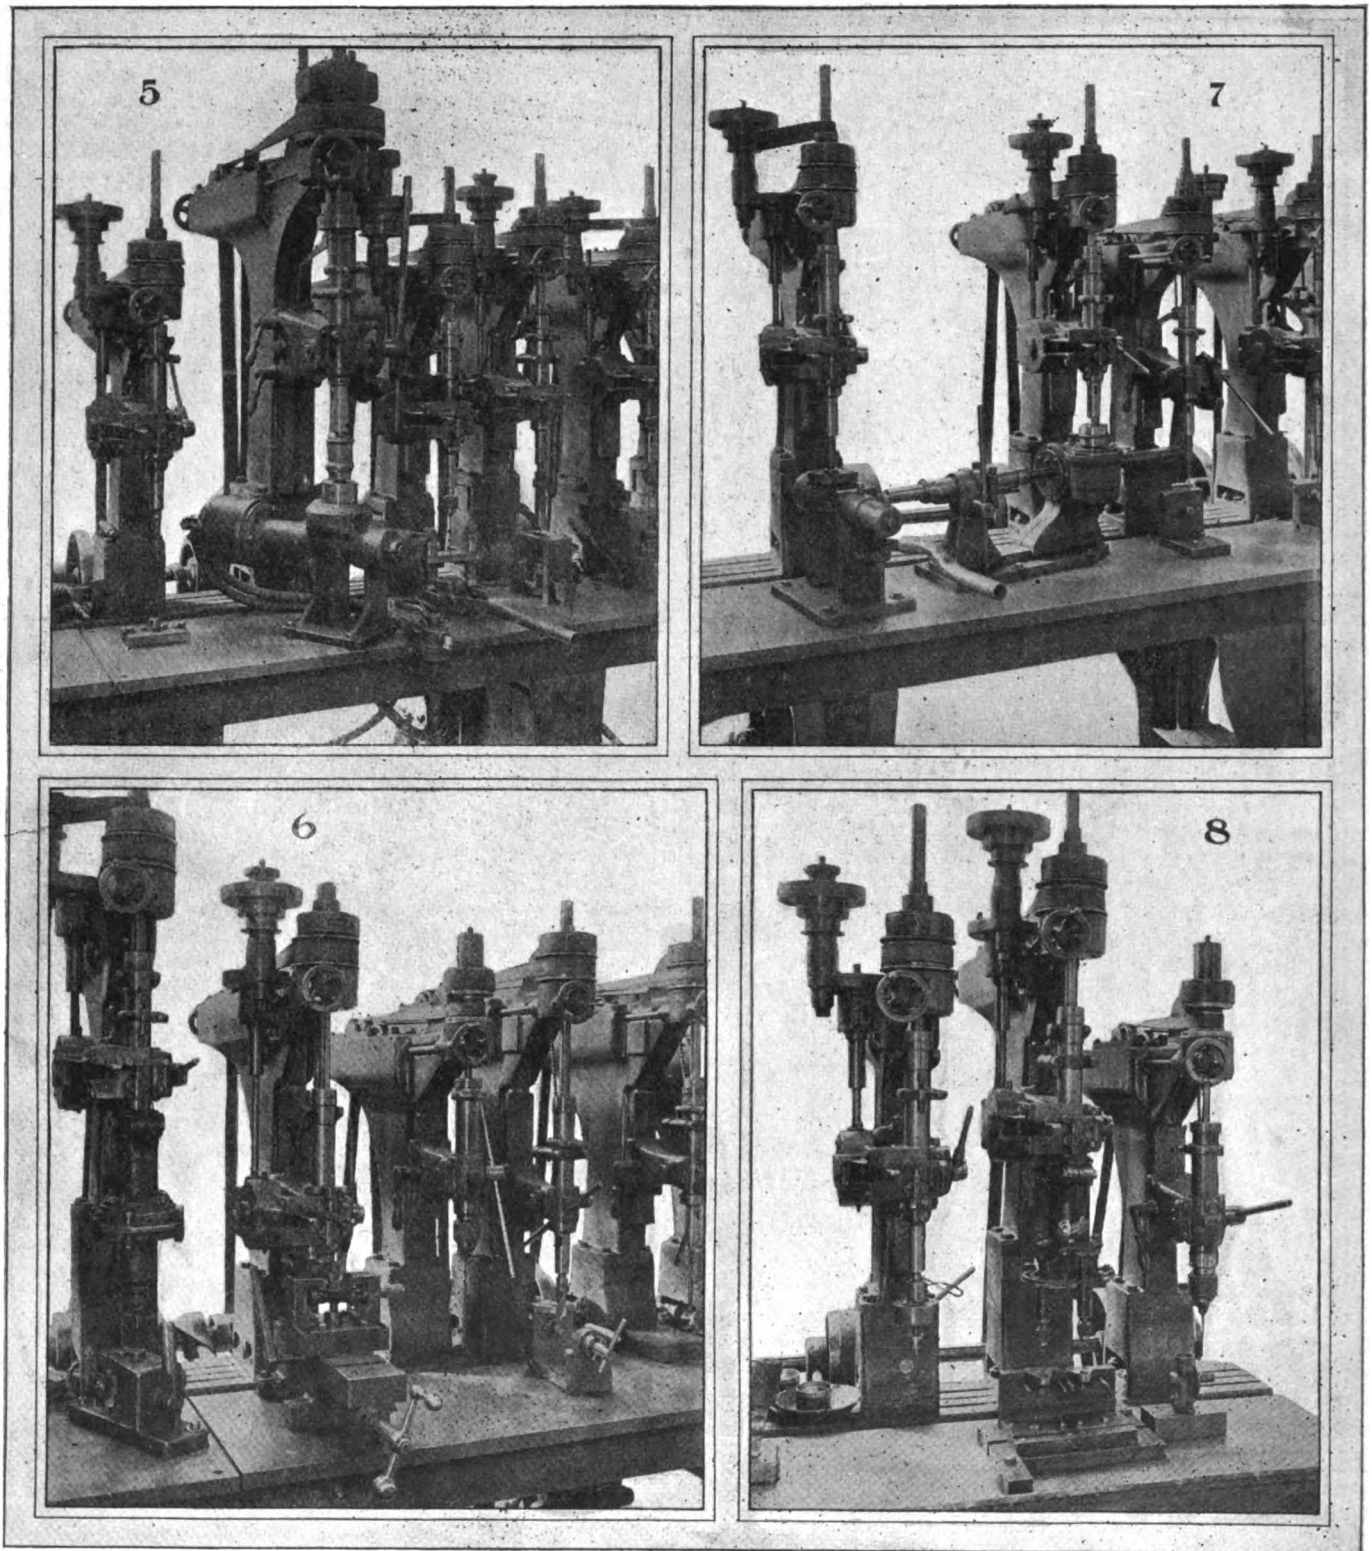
Holley mixing chamber operations 6 to 10. Fig. 6—Five operations, numbers 12, 13, 14, 15 and 16, in the manufacture of the Holley mixing chamber. Fig. 7—Operations 23 to 26. The hollow milling operation shown herewith is performed on a special drilling fixture made in the Holley tool room. It is a stationary fixture with vertical and horizontal spindles operating simultaneously. Fig. 8—Last three operations in the manufacture of the Holley mixing chamber. Described in the text
